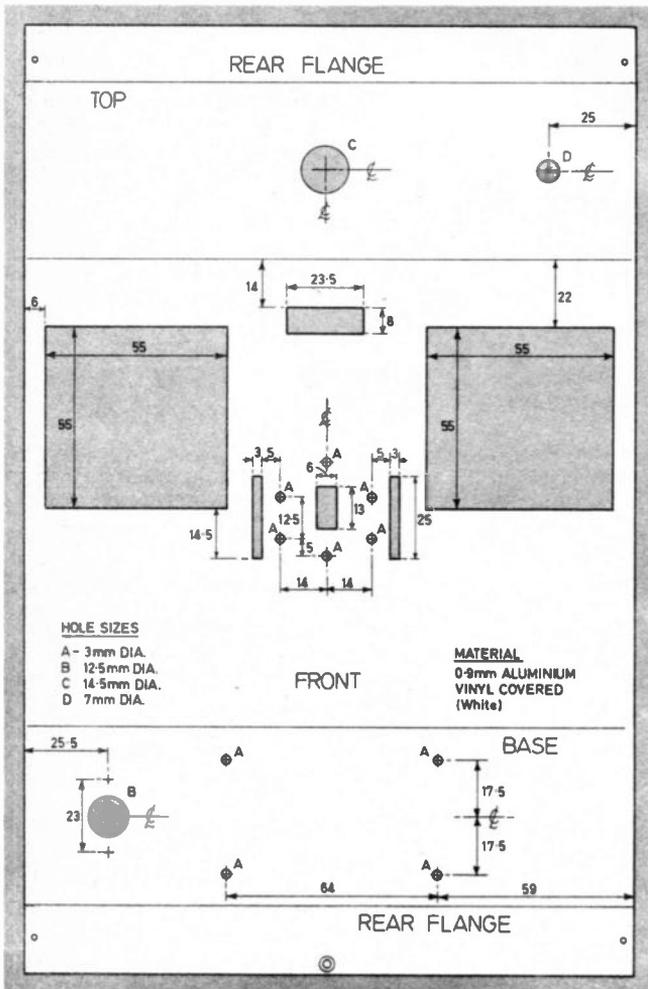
Transmitter case panel opened out flat. Cut-out and drilling details to accommodate controls for seven channels.
